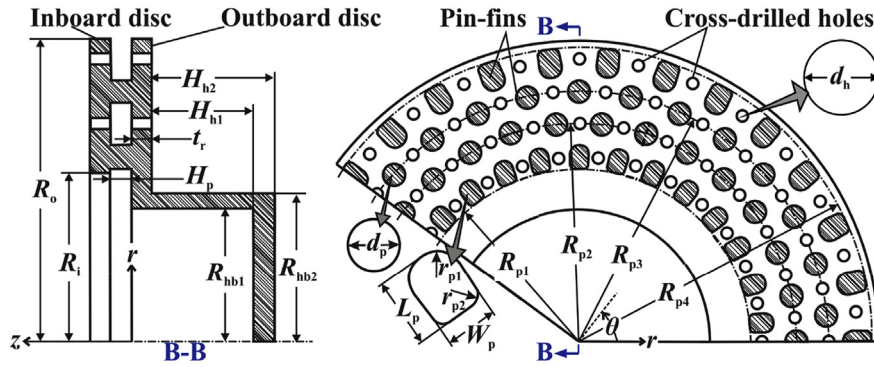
Geometric details of the standard and cross-drilled brake discs with pin-fins.
